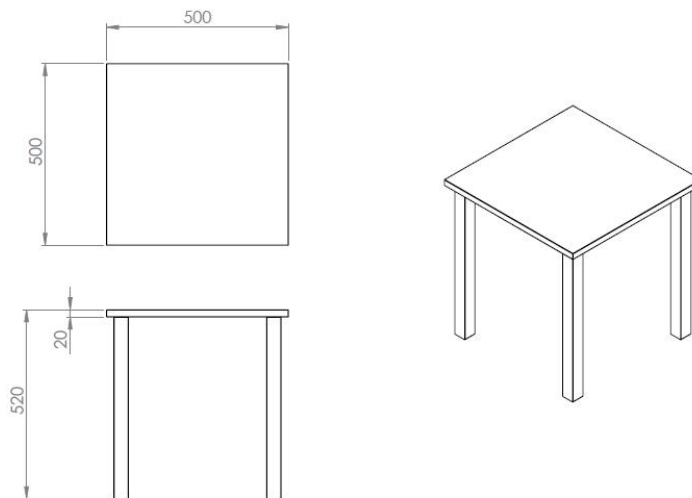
Take OFF/Finish stand/table (all dimensions in mm)
